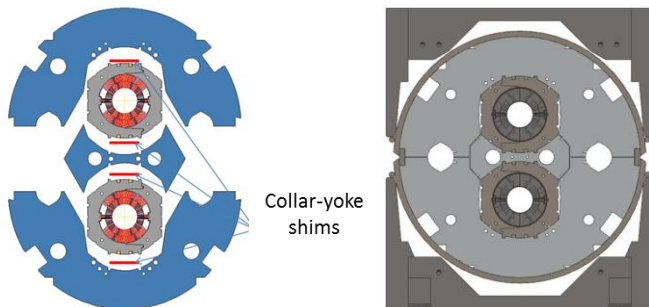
Twin-aperture 11 T dipole model assembly shimming (left) and cold mass welding (right) schemes.
